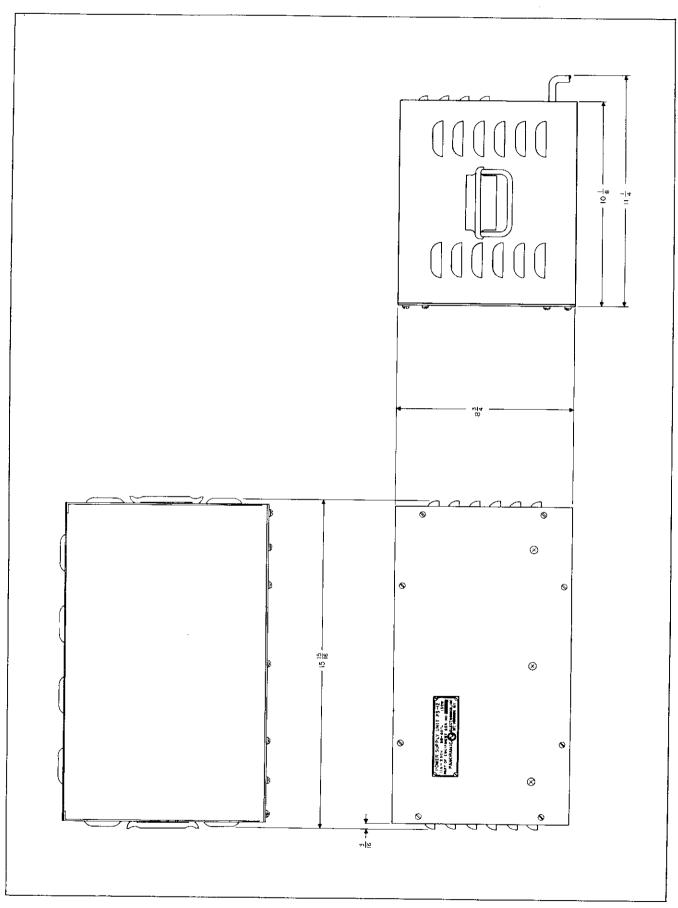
Outline Dimensional Drawing, Model PS-12 in Cabinet.
